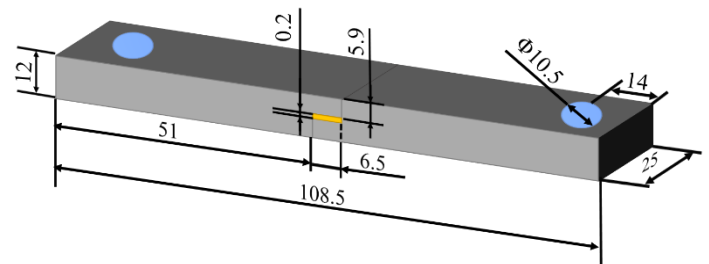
Dimensions of thick adherend shear test specimen (mm)
